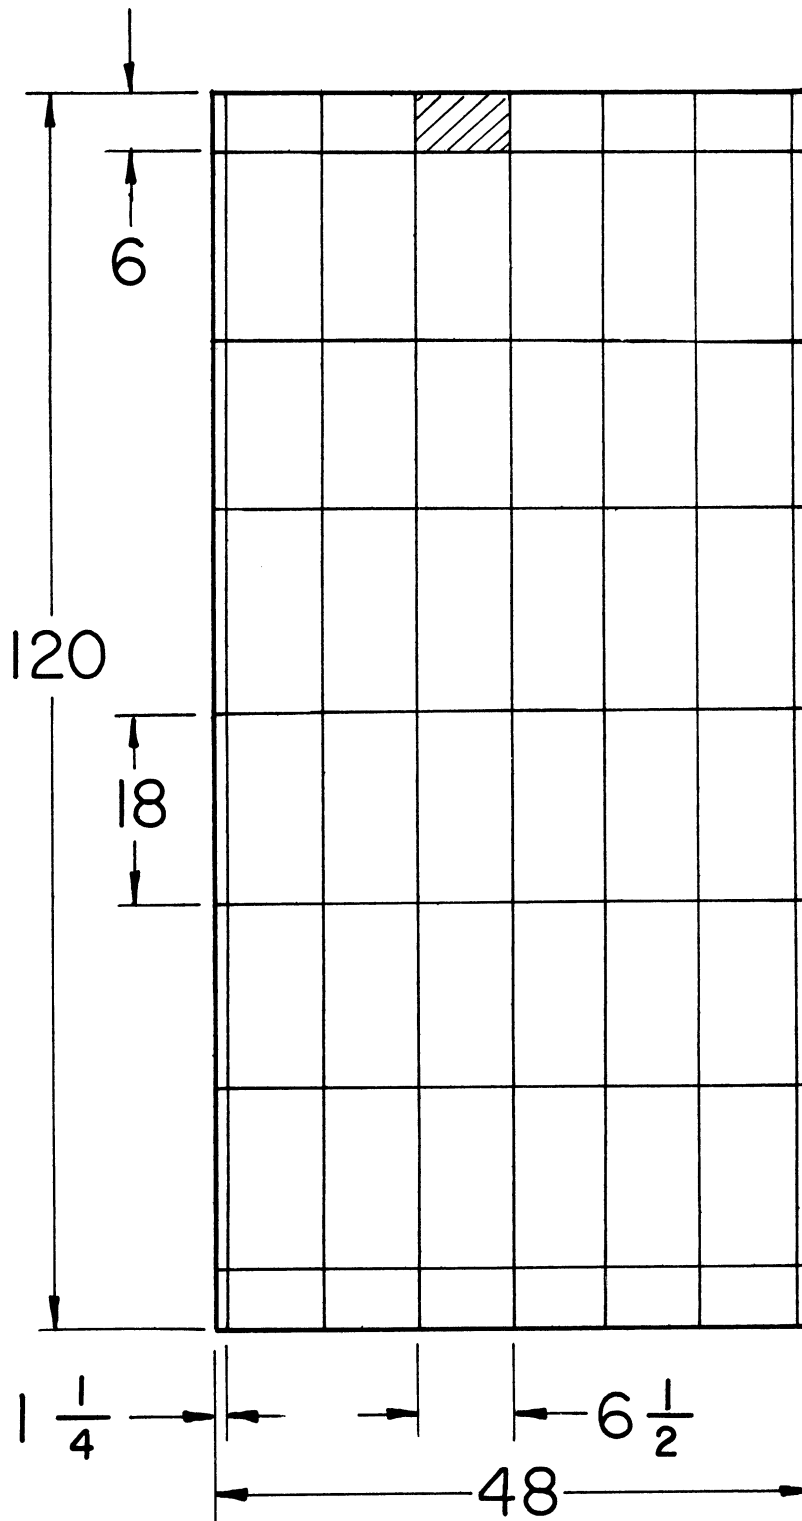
Sheet stock showing orientation of specimen blanks. Smaller end blanks used for tensile specimens.
